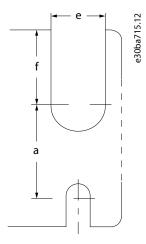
Top and Bottom Mounting Holes, Enclosure Sizes B4, C3, and C4
